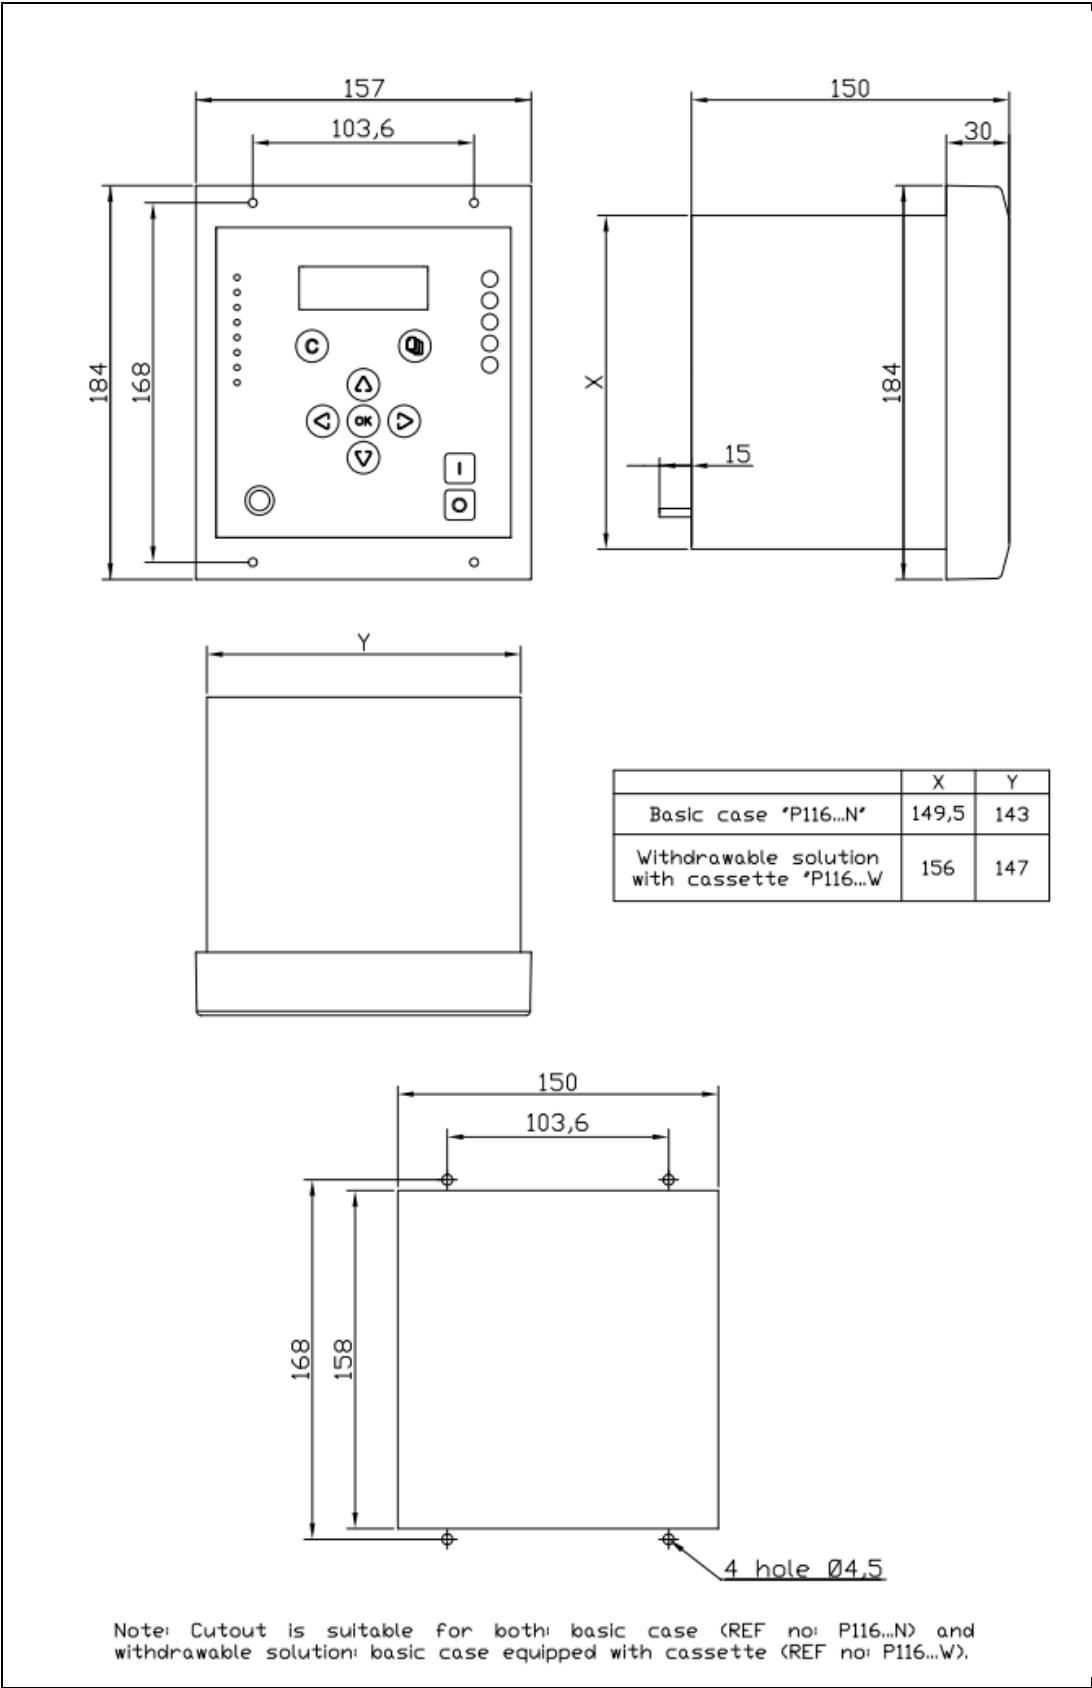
Dimensions: P116 flush mounting case – basic and withdrawable solution with cassette
